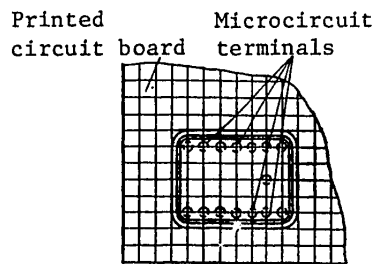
Assembly of a microcircuit on a printed circuit board.
